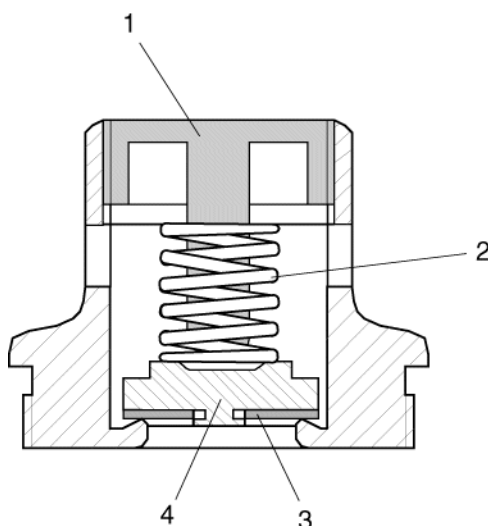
Sectional view of the safety valve, for legend see [Table 11](#)
